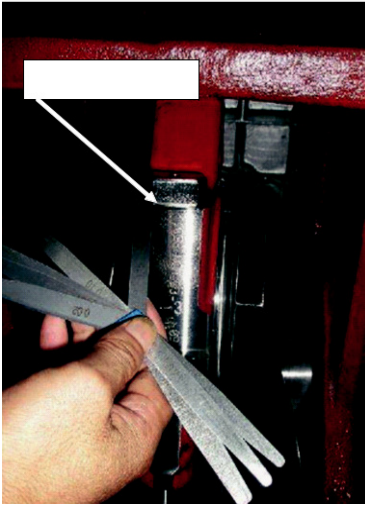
Introduction of feeler gauge between connecting rod bolt head and connecting rod.
